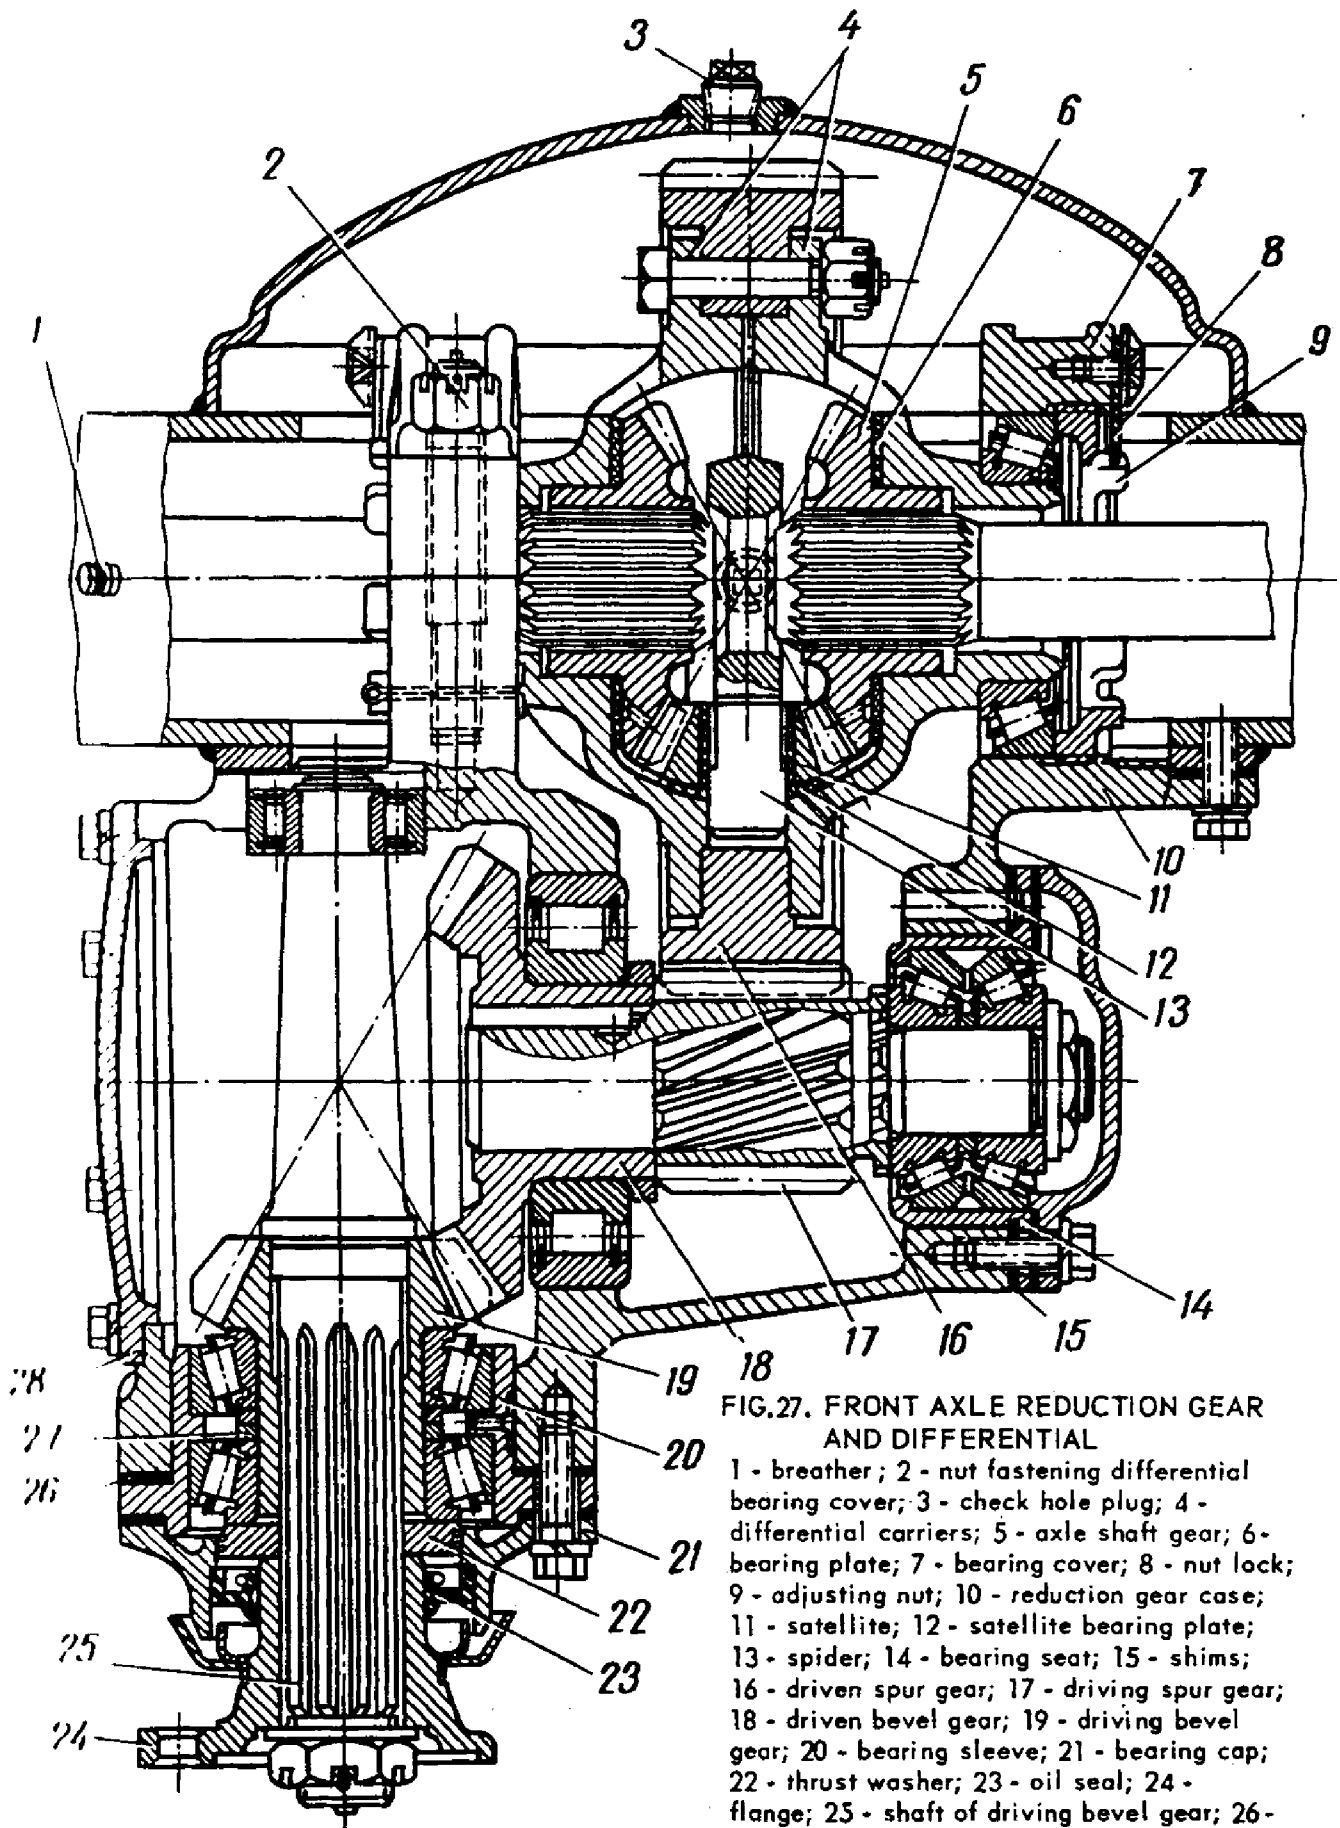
FRONT AXLE REDUCTION GEAR AND DIFFERENTIAL
